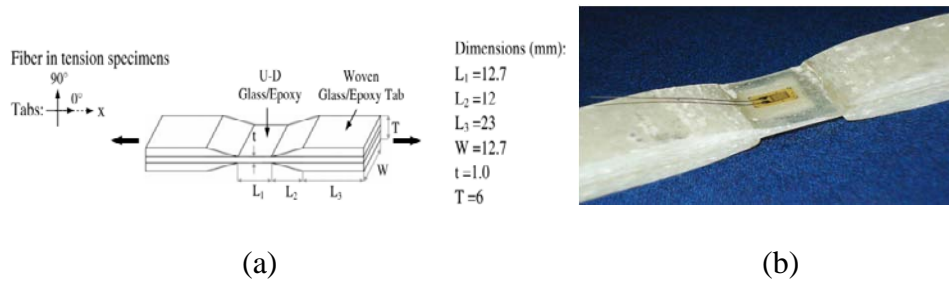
Geometry and dimensions of composite specimens under tensile loading (b) untested specimen [62].
